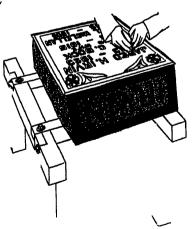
THE DESIGN IS OUT AWAY WITH A SHARP KNIFE FOLLOW-ING THE OUTLINE JUST DRAWN
